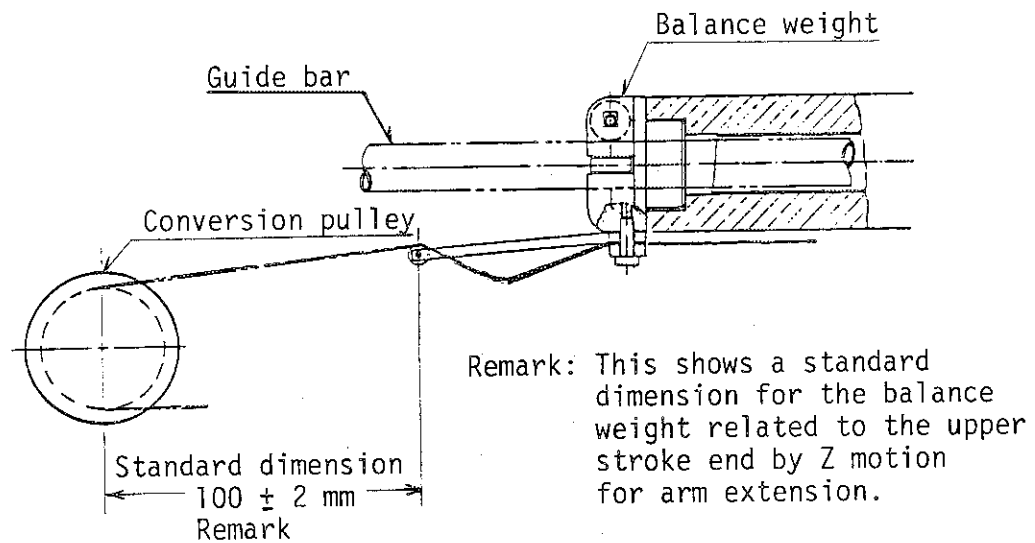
Setting dimension for Z motion balance weight on the tape
